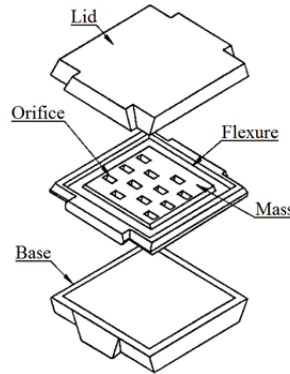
Exploded view of a micro-machined capacitive accelerometer (source: Harris [5])
